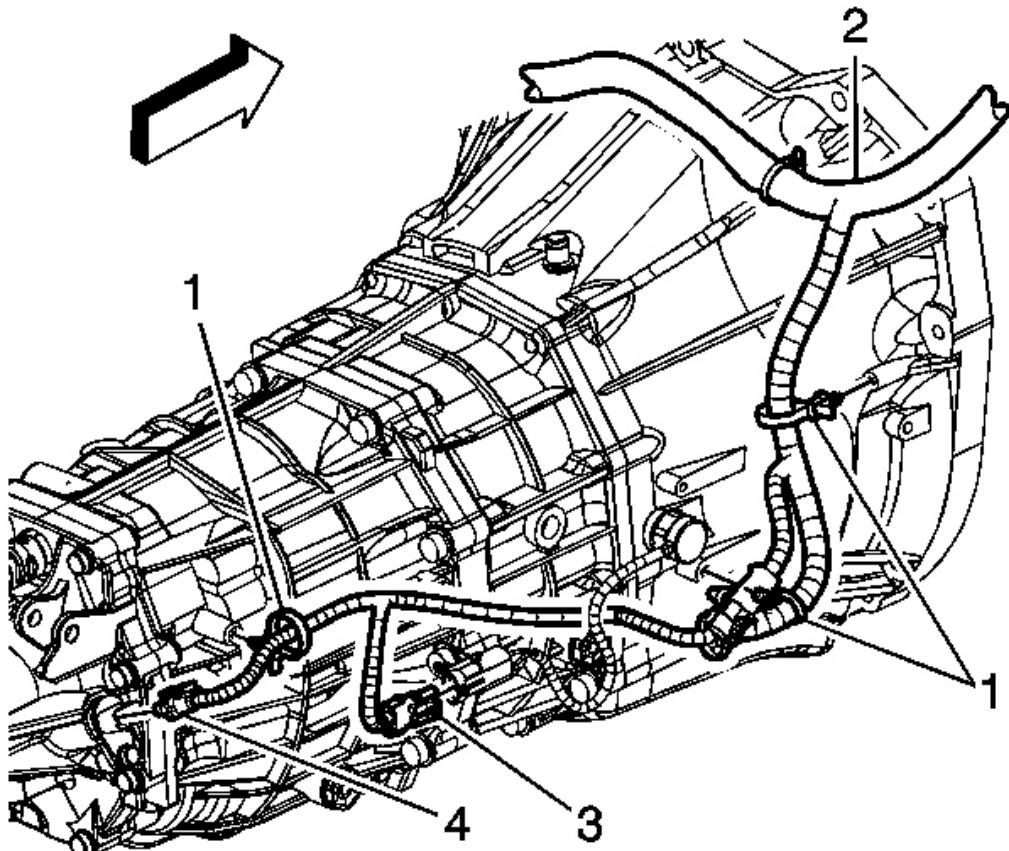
Identifying Electrical Connectors & Harness Retainers
